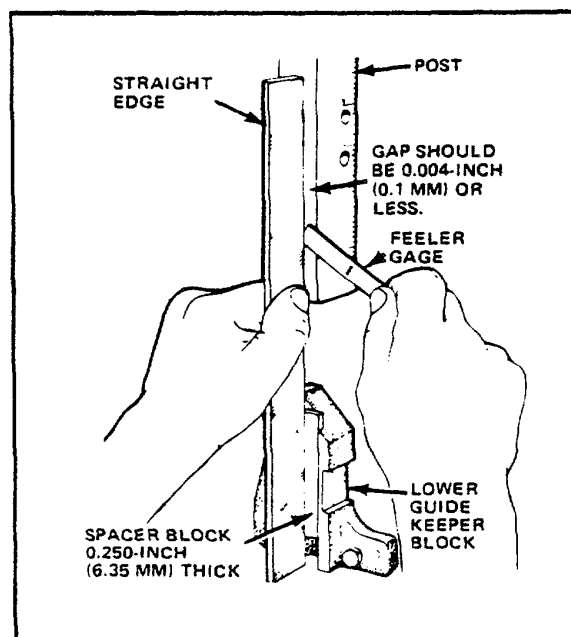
ALIGN POST TO LOWER SAW GUIDE KEEPER BLOCK.
